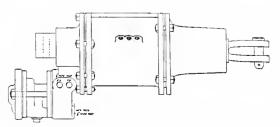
8-in. x 8-in. Car Brake Cylinder, with Type S-1 Triple Valve.
